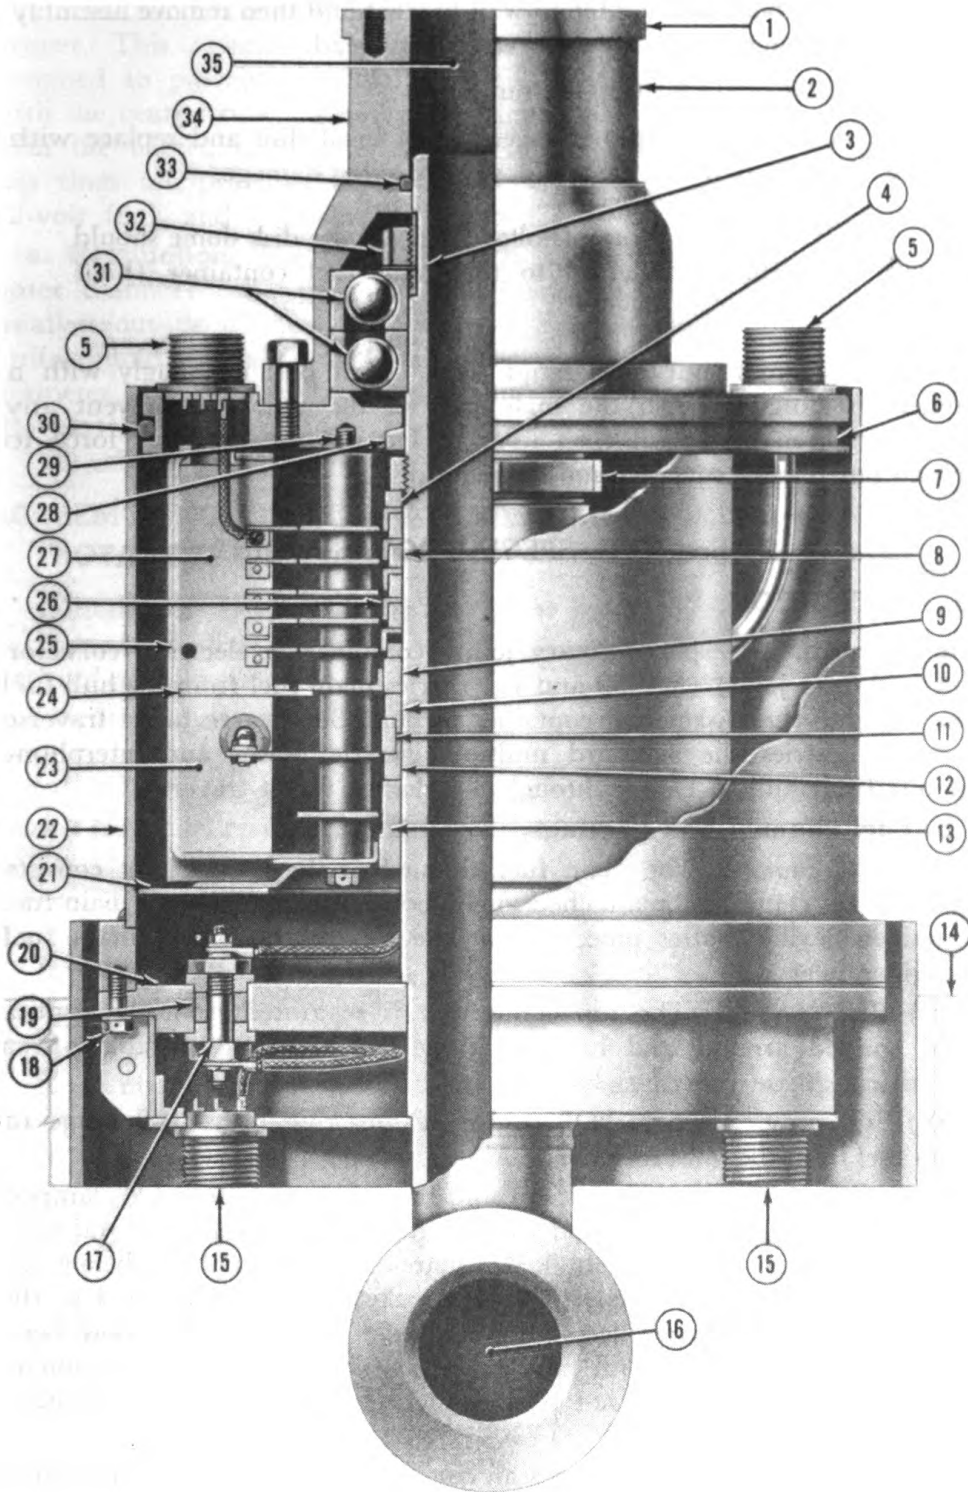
Special rotary joint (combination electrical collector ring and fluid joint) shown in cutaway view.
